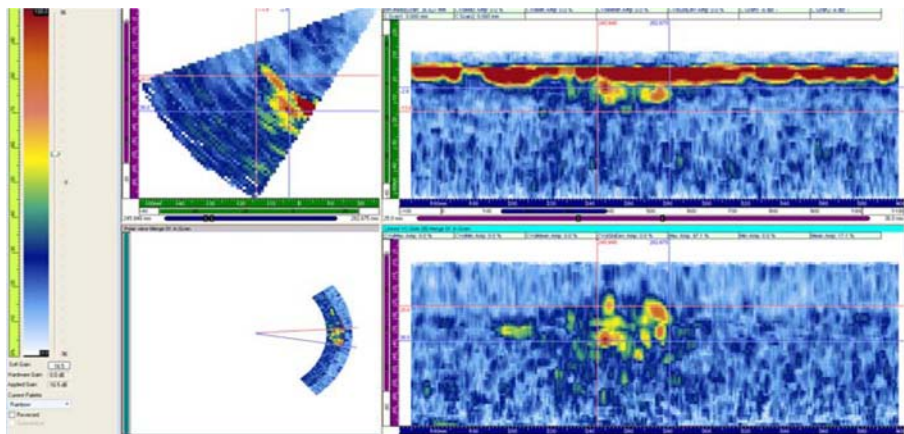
Specimen 9C-034 Flaw 3 After Weld Crown Removal at 1.5 MHz, Line Scan Data
